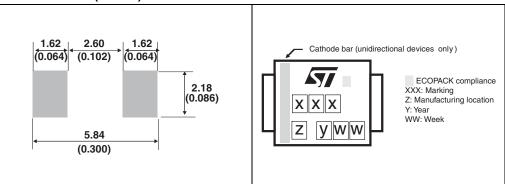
SMB footprint dimensions in Figure 18. Marking layout⁽¹⁾ mm (inches)
